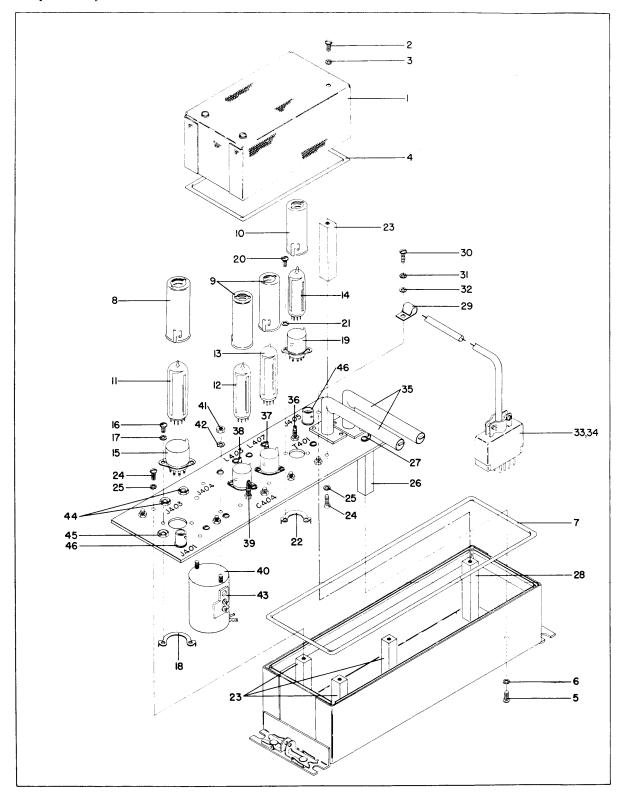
Sweeper Assembly, Top Exploded View (Sheet 1 of 2 Sheets), Index Nos. 1 through 46
